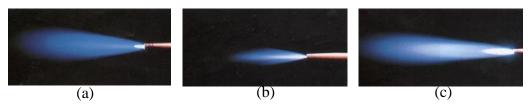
(a) Neutral flame, (b) Oxidising flame, and (c) Carburising flame [6] Welding is generally carried out using the neutral flame setting which has equal quantities of oxygen and acetylene. The oxidising flame is obtained by increasing just the oxygen flow rate while the carburising flame is achieved by increasing acetylene flow in relation to oxygen flow. Because steel melts at a temperature above 1,500°C, the mixture of oxygen and acetylene is used as it is the only gas combination with enough heat to weld steel. However, other gases such as propane, hydrogen and coal gas can be used for joining lower melting point non-ferrous metals, and for brazing and silver soldering [6].
